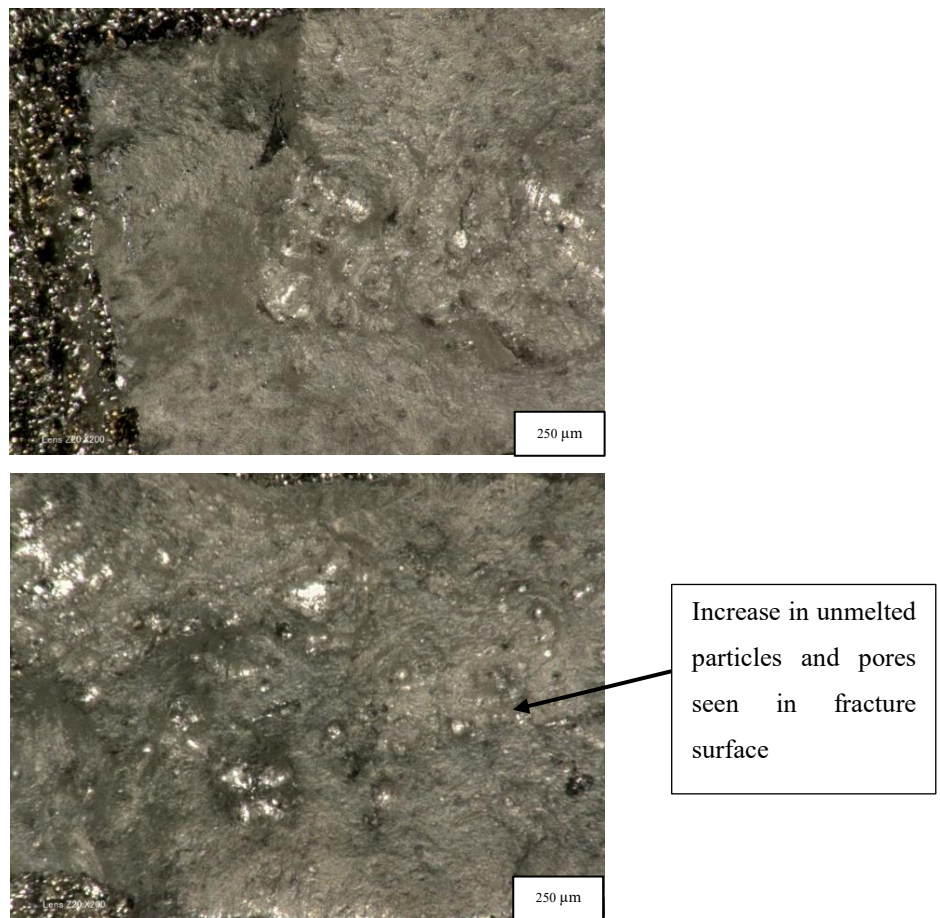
77: Tensile Fracture Surface Build 17 Vertical, Meander Laser Path, Exposure Time 80 μ s, Laser Power 200W, As Built
